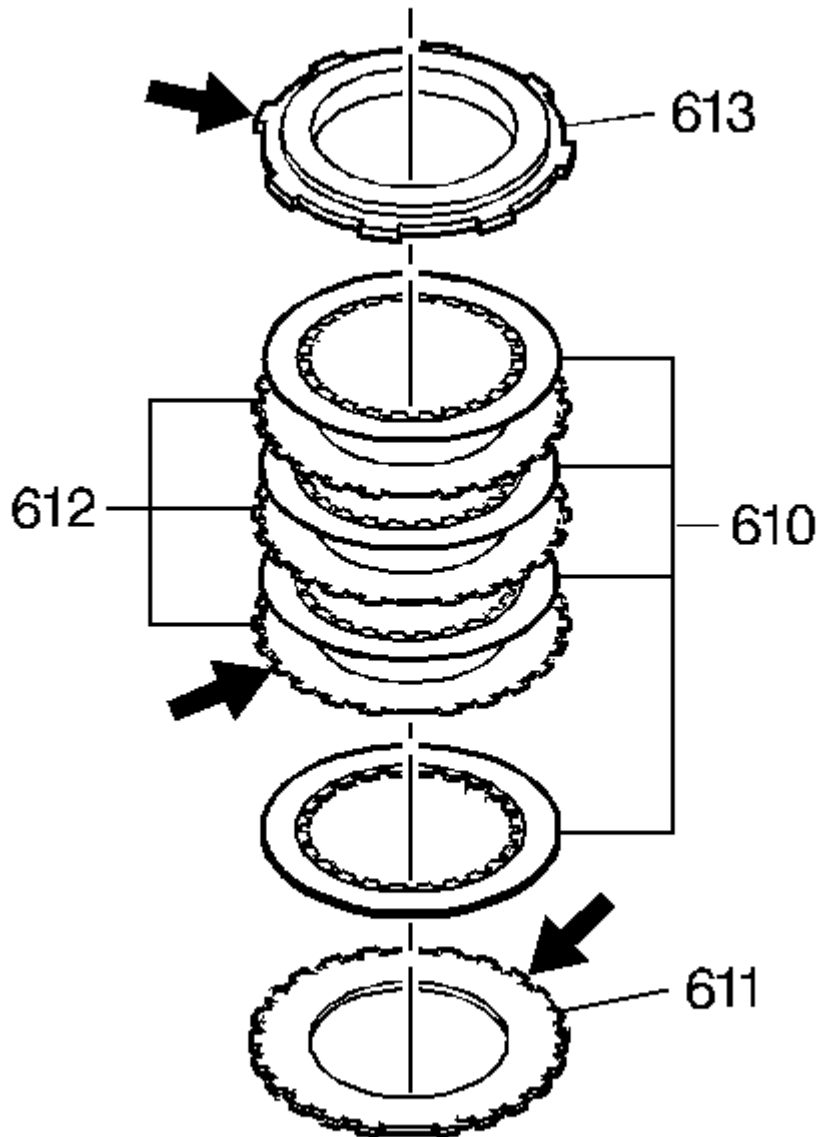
View Of Inspection Areas On 3rd Clutch Plates
